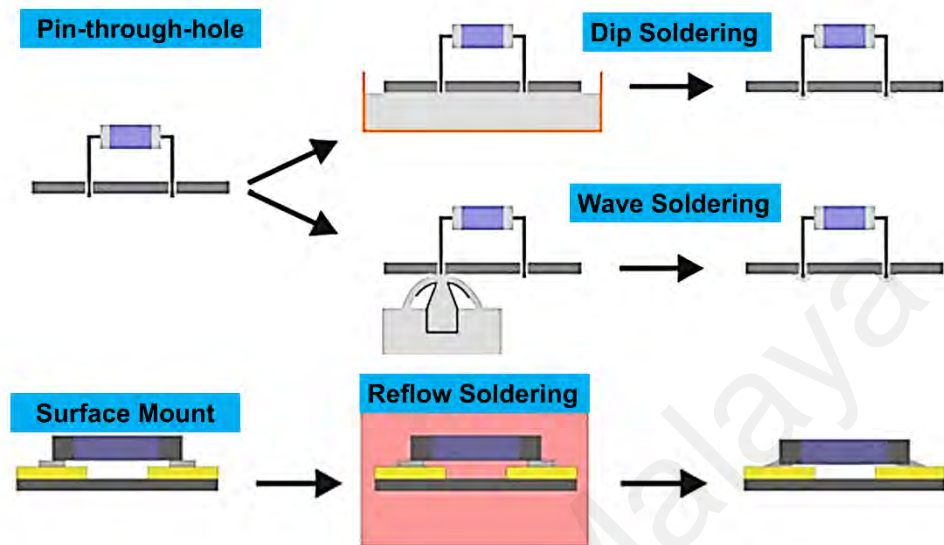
Dip soldering and wave soldering in Pin-through-hole package, reflow soldering in surface mount package (Zhang, 2015).
